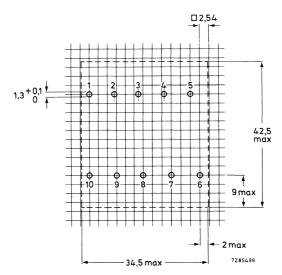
Hole pattern for mounting on a printed-wiring board, viewed from the solder side.
